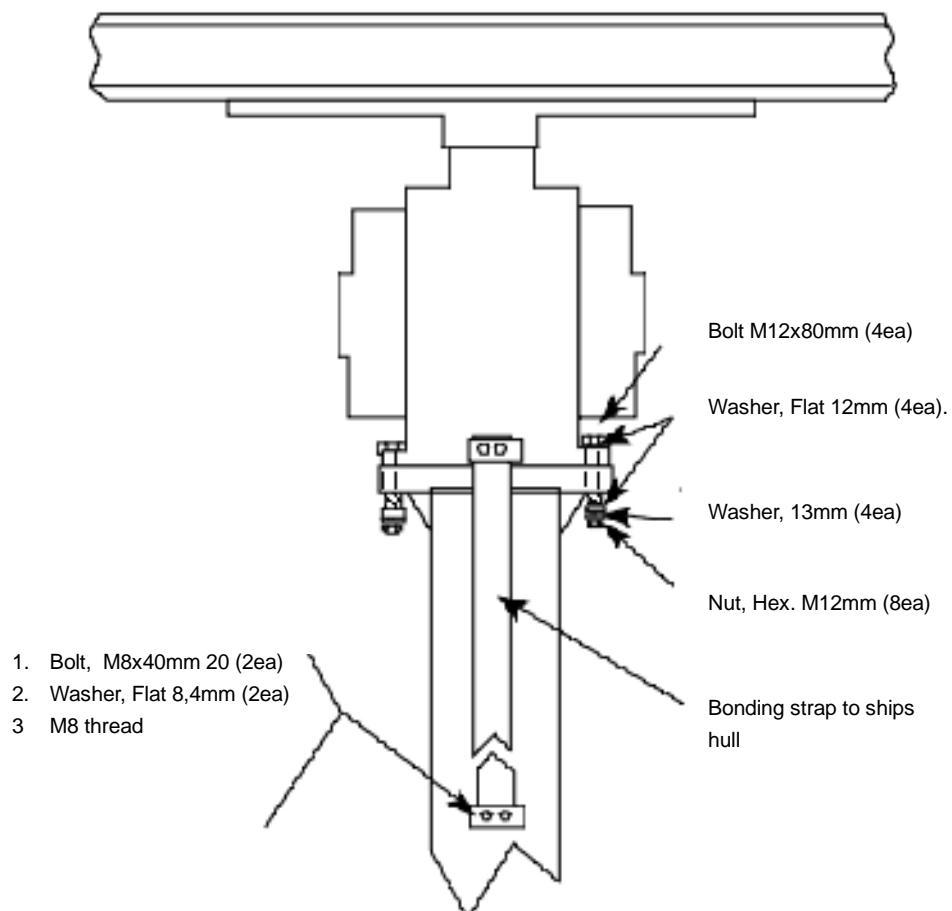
NSC MTR Up/Pedestal Mounting and Bonding
